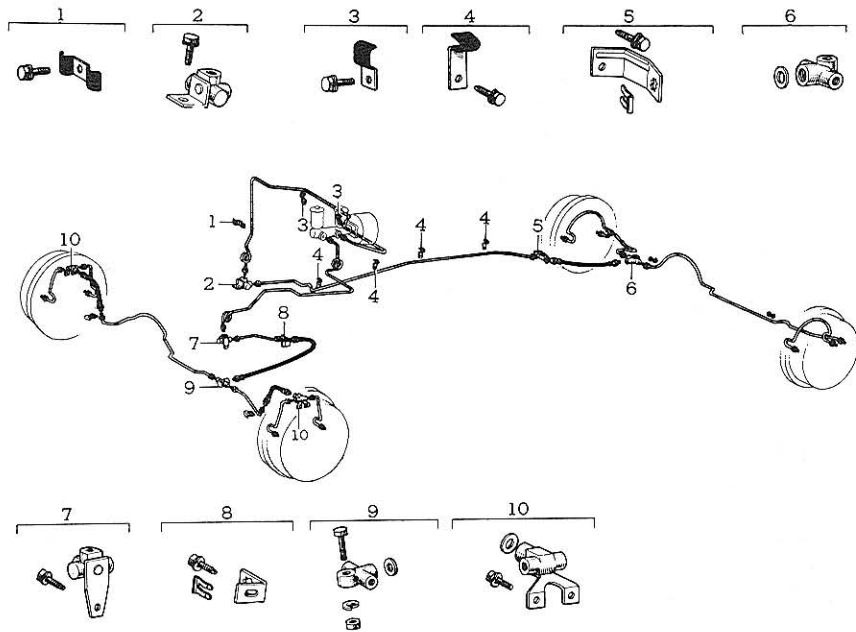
Brake Line Components, FJ55(L)(V)-OPT
